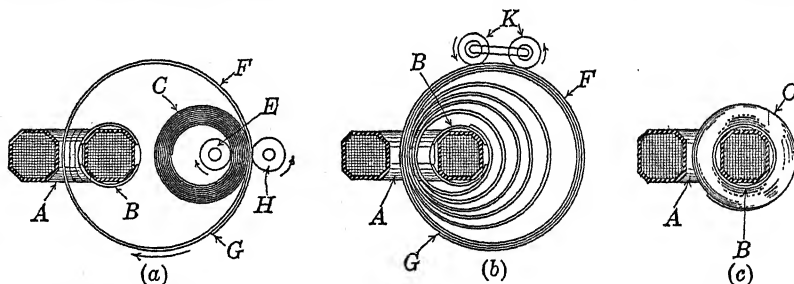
Winding core about coil in spirakore transformer. (General Electric Co.)
